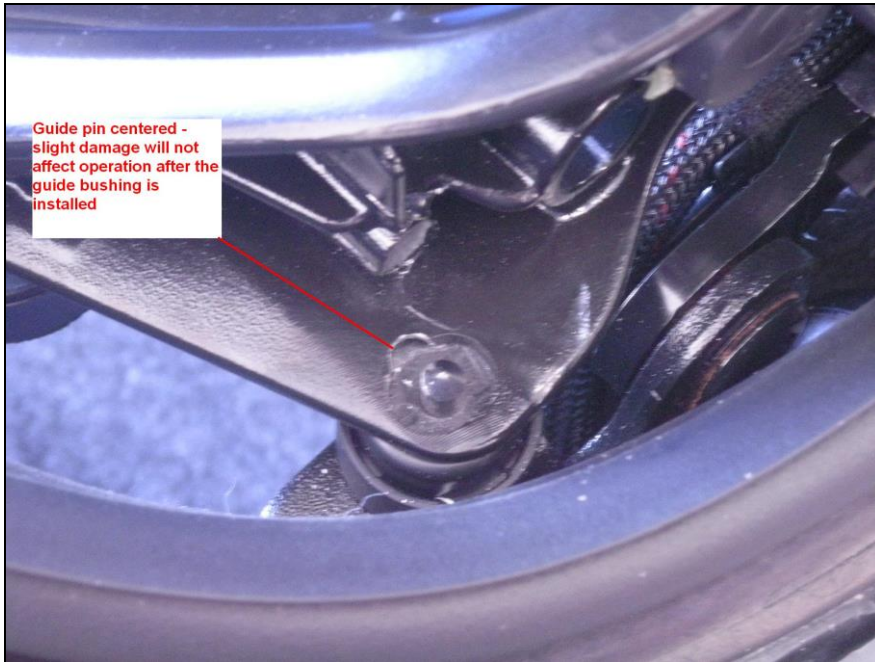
Guide pin centered after adjustment and before installation of new guide bushing.
